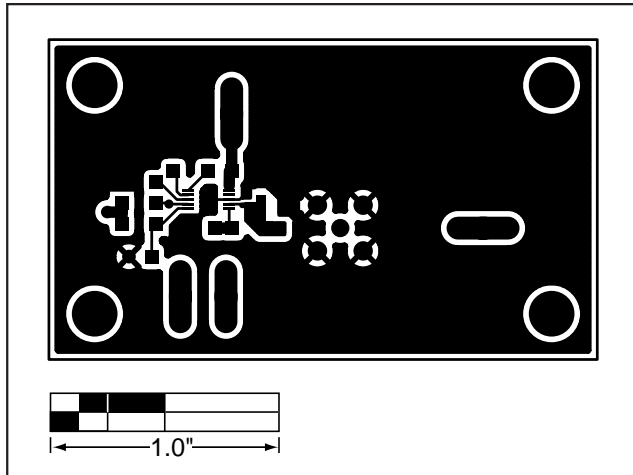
MAX881R EV Kit PC Board Layout—Component Side
